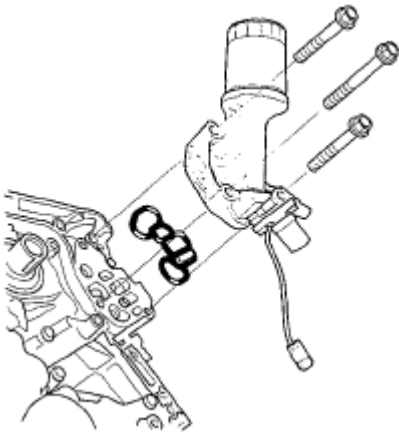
Identifying Rocker Arm Oil Control Solenoid/ Oil Filter Assembly
